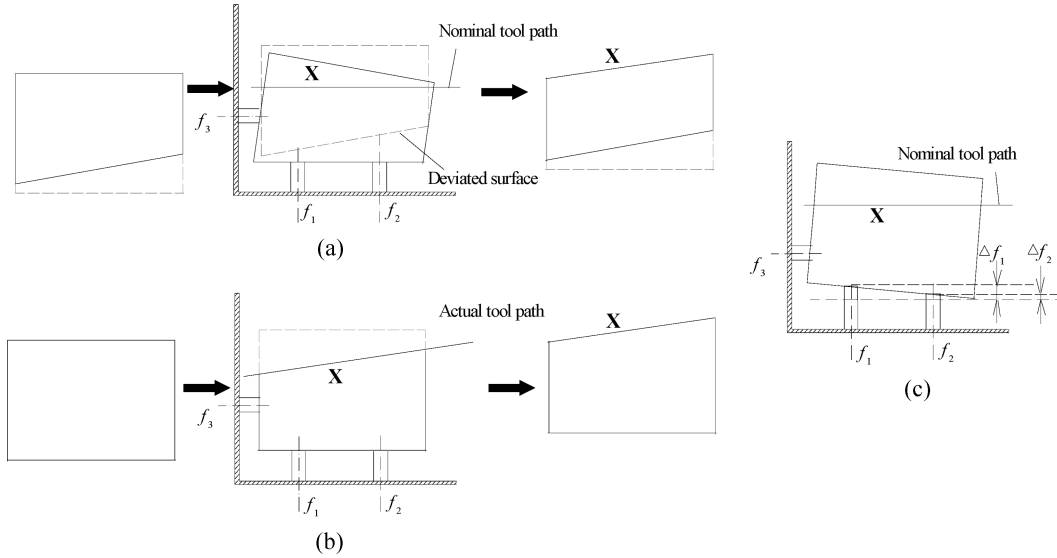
The EFE concept: (a) a machining process with a datum error; (b) a machining process with a machine tool error; and (c) a machining process with a fixture error.
